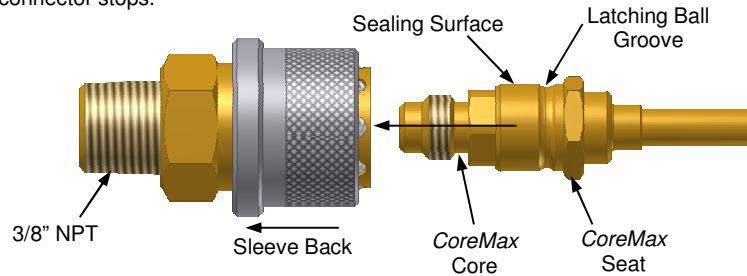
Above, Shows MBE Attaching to CoreMax Core & Seat
